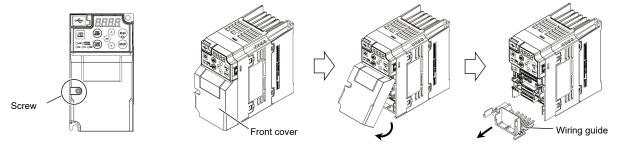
Removal of the front cover and the wiring guide (for FRN0006E3S-2G)
